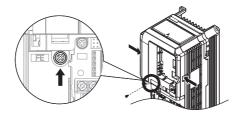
Remove the Front Cover (2A0004 to 2A0081 and 4A0002 to 4A0044)
